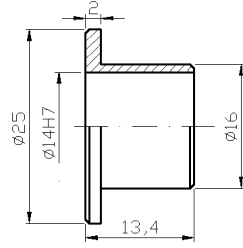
Geometry and dimensions of the metallic insert (dimensions in mm).
